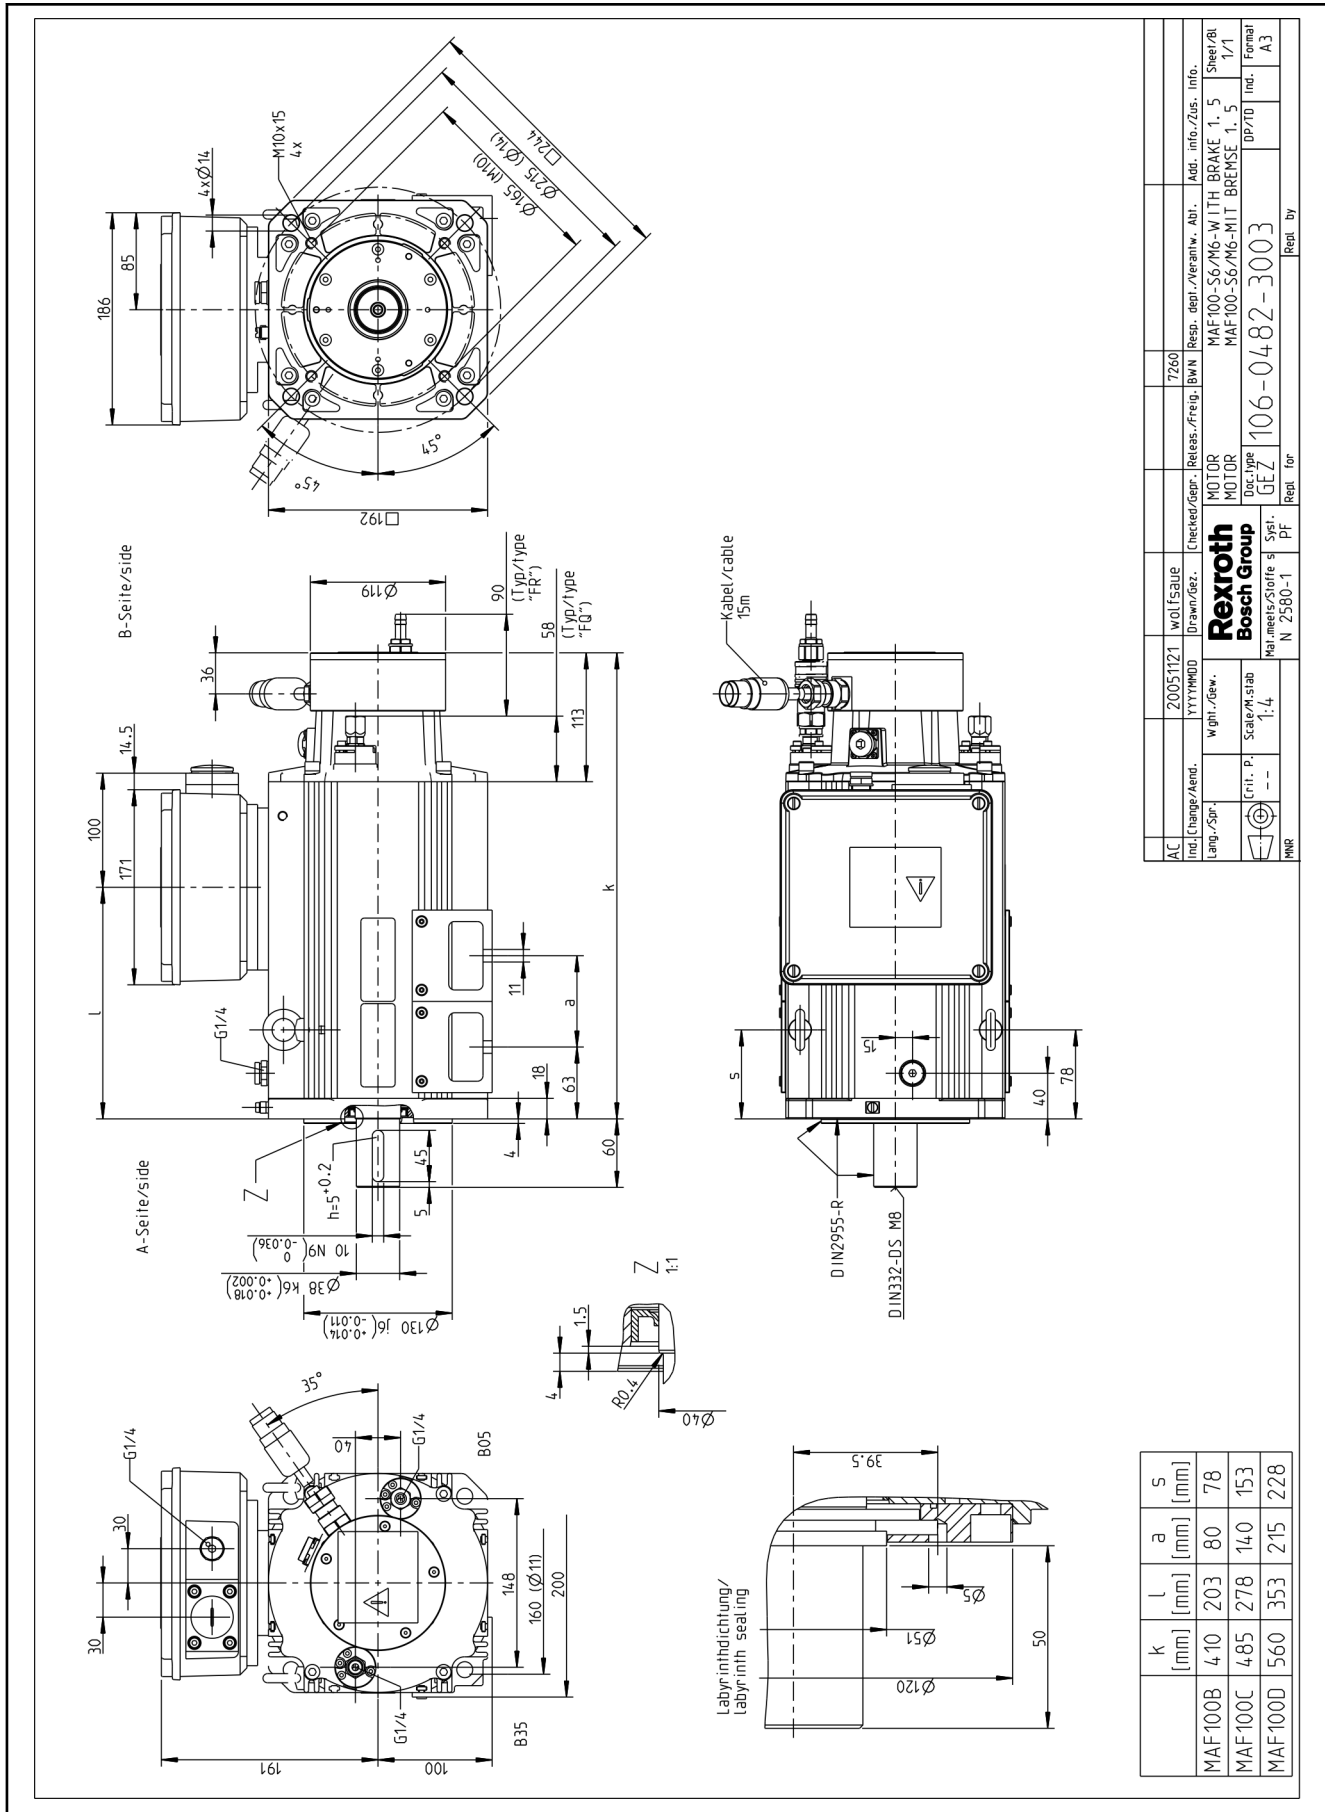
MAF100 with M6/S6 encoder, brake 1/5
